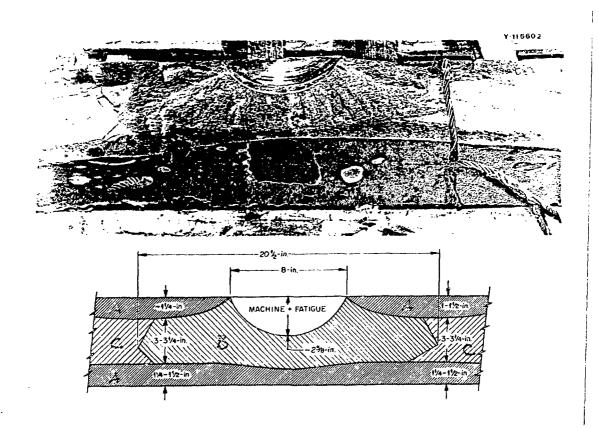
THIS ILLUSTRATES THE LOCATION AND EXTENT OF THE VARIOUS TYPES OF FRACTURE SURFACES. A-SHEAR LIP, B-DUCTILE, C-CLEAVAGE. (1 INCH = 0.0254 METER)
